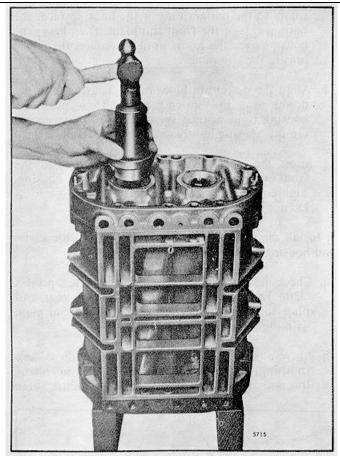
Installing Roller bearings on Rotor Shafts and in Front End Plate using Tool J 6270-13
